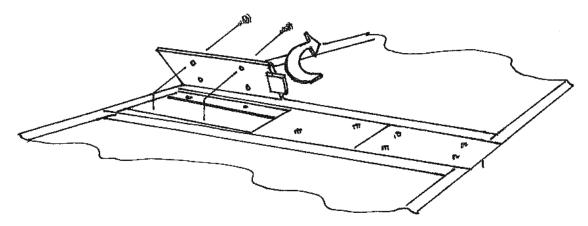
Removal of Cover Plates on Cardinal PRC and EPR
